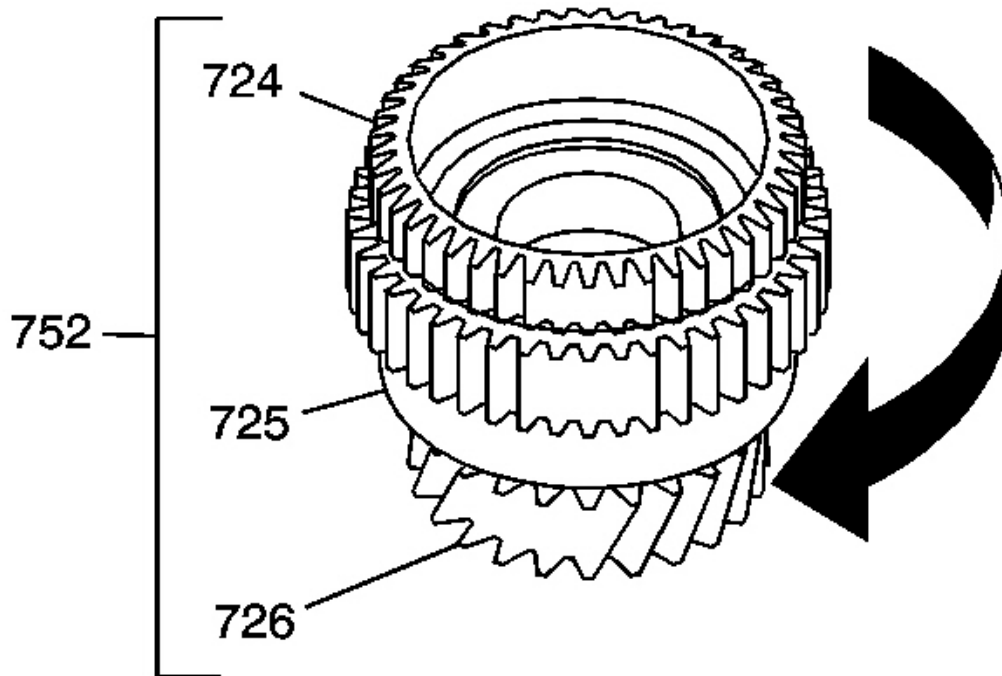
Inspecting The Operation Of 1st/Coast Hub & Coast Sprag Assembly
